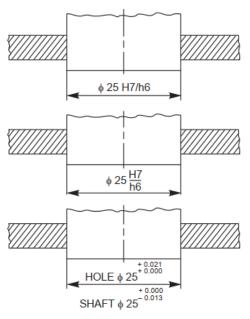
Toleranced dimensioning of assembled parts
